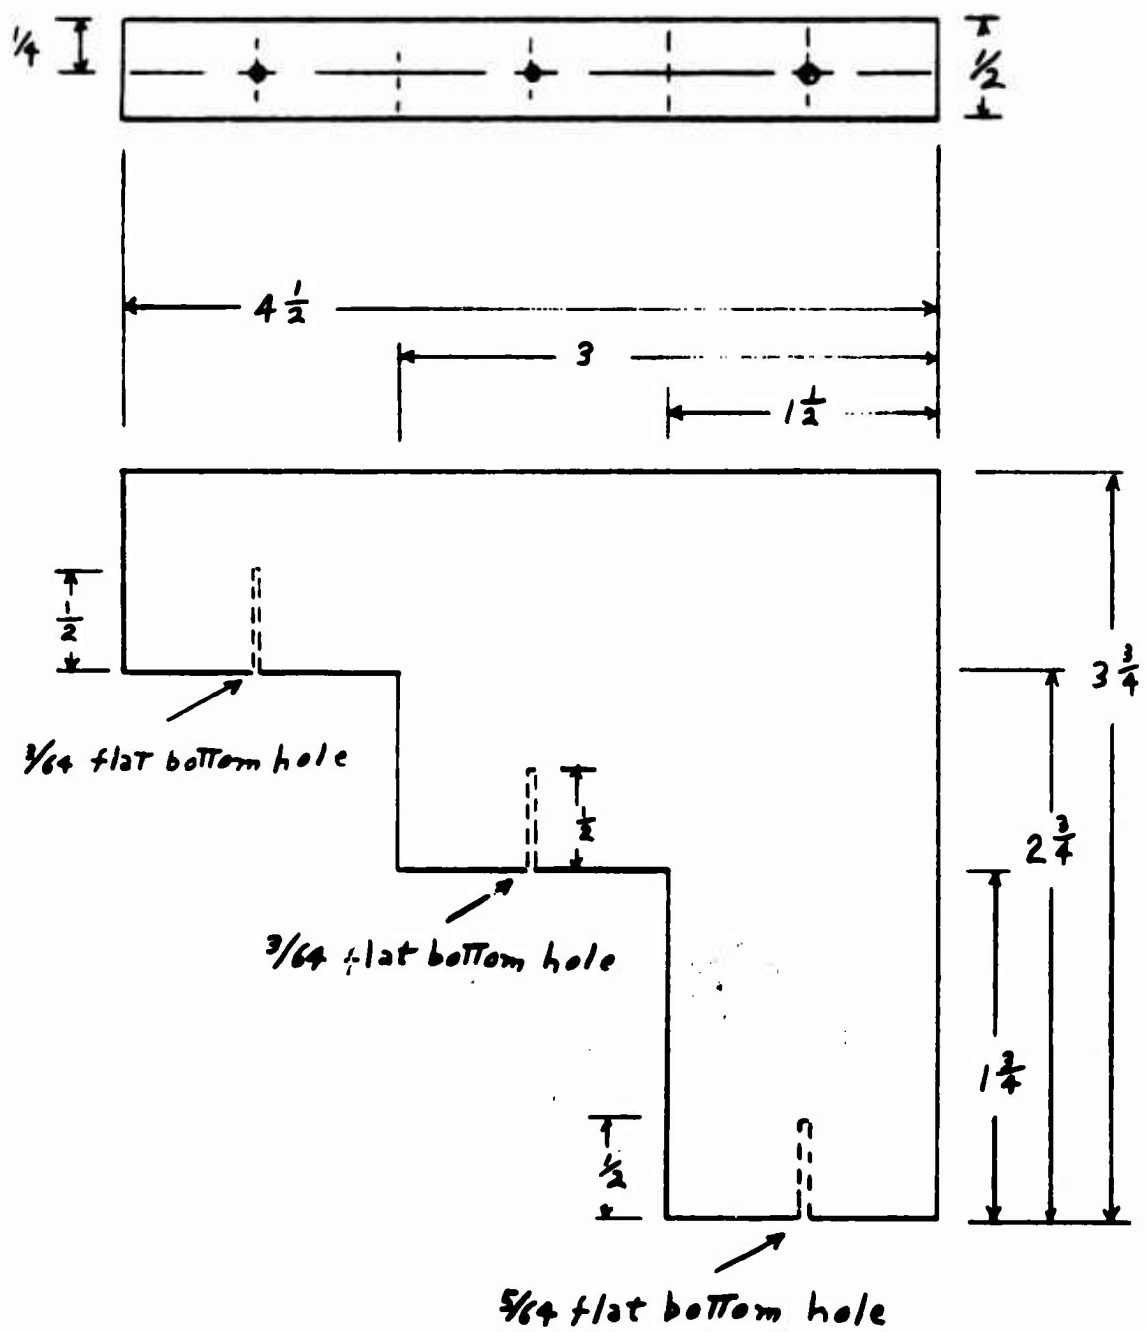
Drawing of the Rotor Hub Arm Wall Standard
